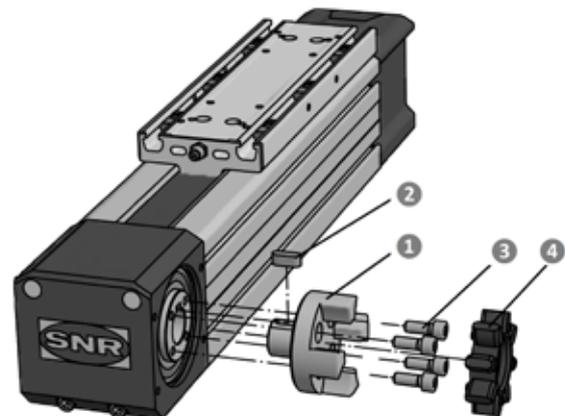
Force-fitted mounting of couplings on Linear Axis with toothed belt drive
